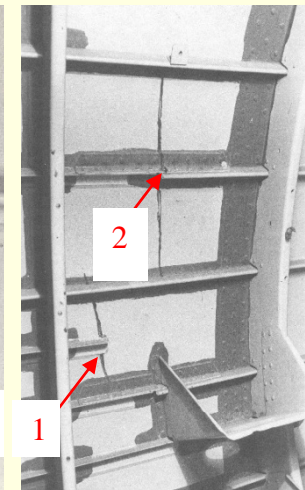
The fatigue cracks in a skin are initialized by the stress concentration 1) near last fastening point 1 in point-welded connection with tip of a stringer 2) near the most loaded fastening point in rivet-joint of two parts of a stringer
